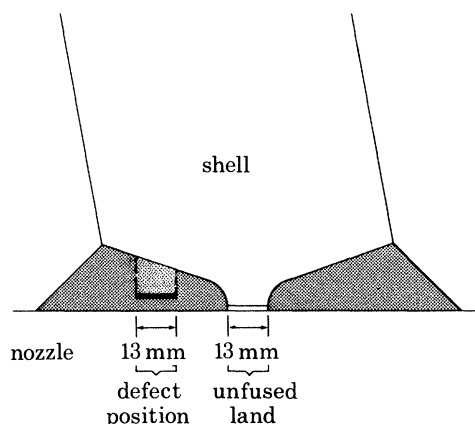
Position of defect in set through nozzle weld of steam drum.
